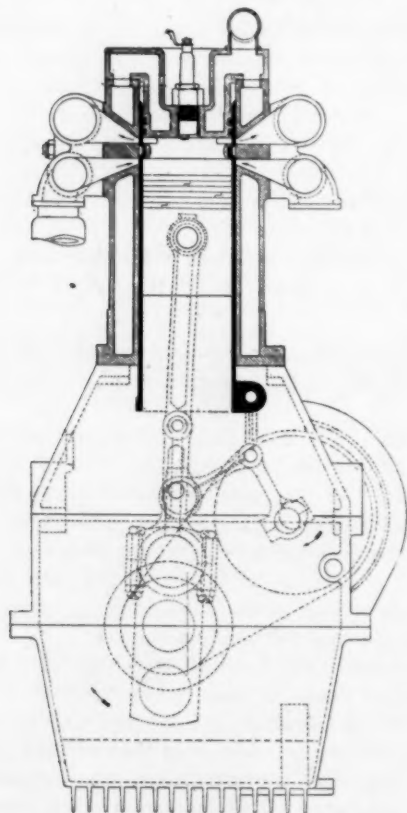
SINGLE-SLEEVE-VALVE MOTOR
